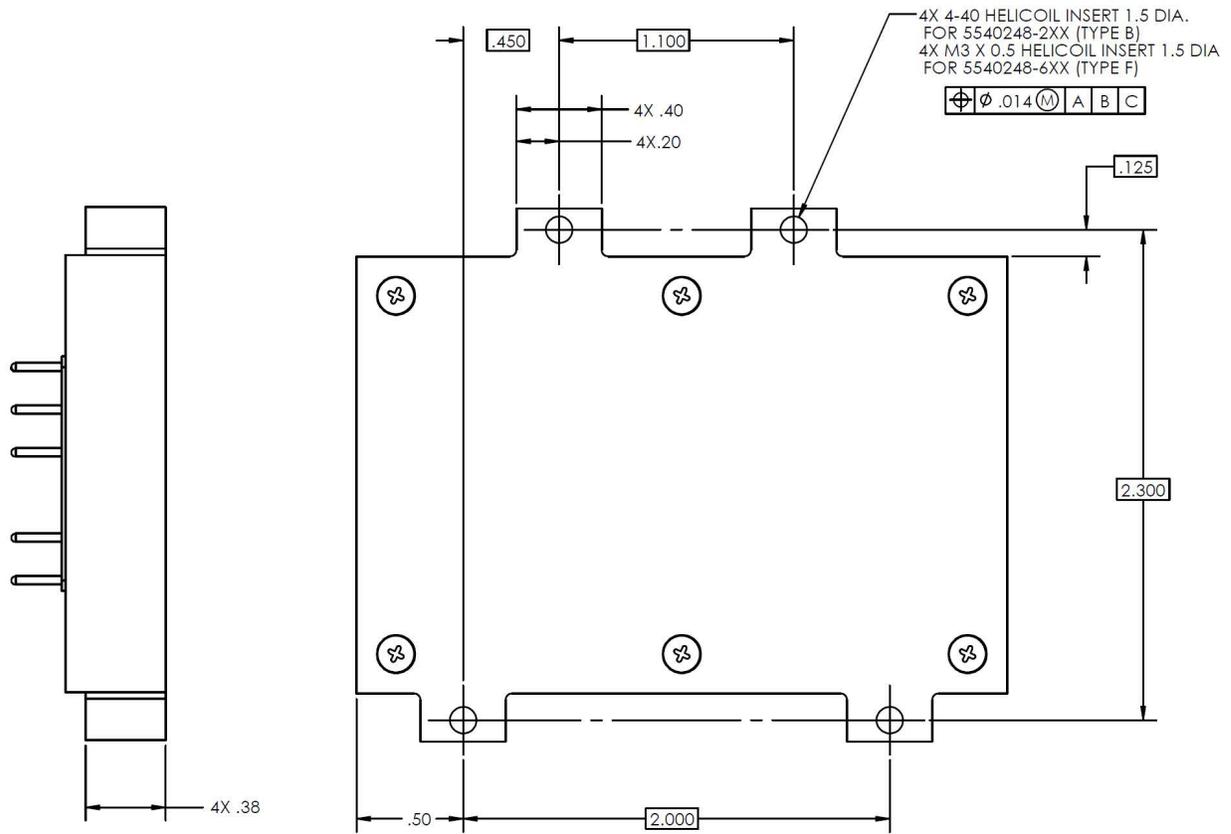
Radial Pins and Threaded Tabs Package Bottom View (-B or -F)
